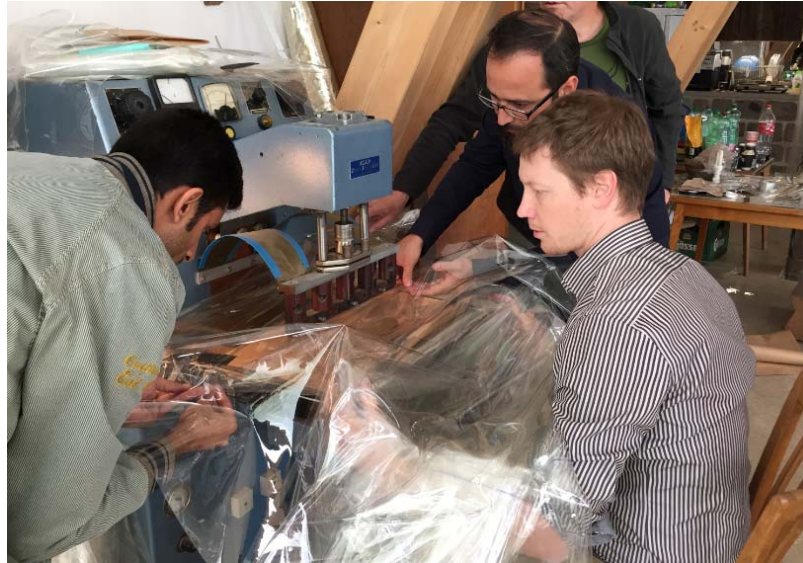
35: Welding work of air-inflated wall.
